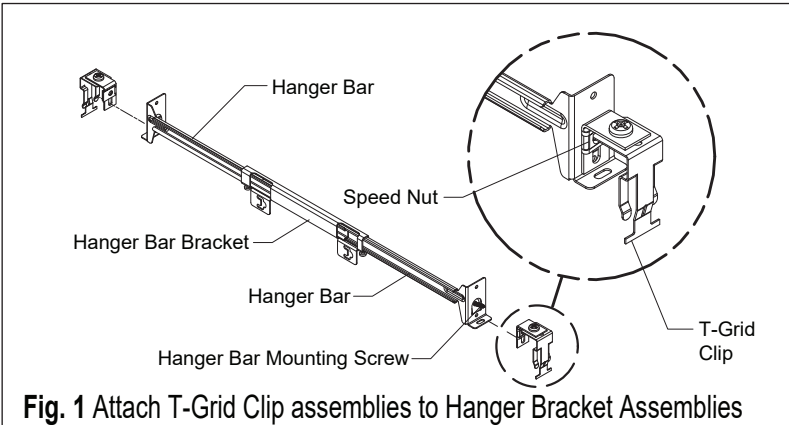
Attach T-Grid Clip assemblies to Hanger Bracket Assemblies
